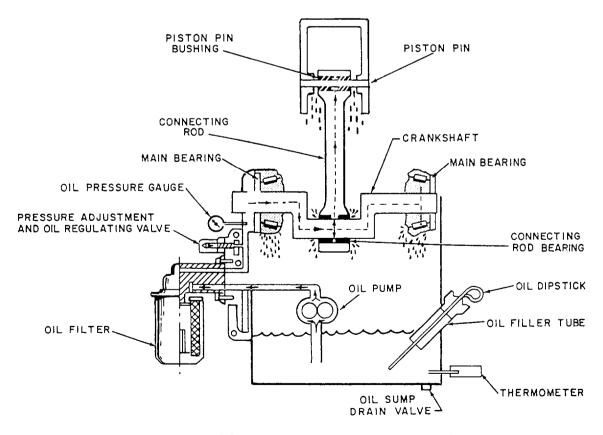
Pressure type of lubricating system on a reciprocating type of air compressor.
